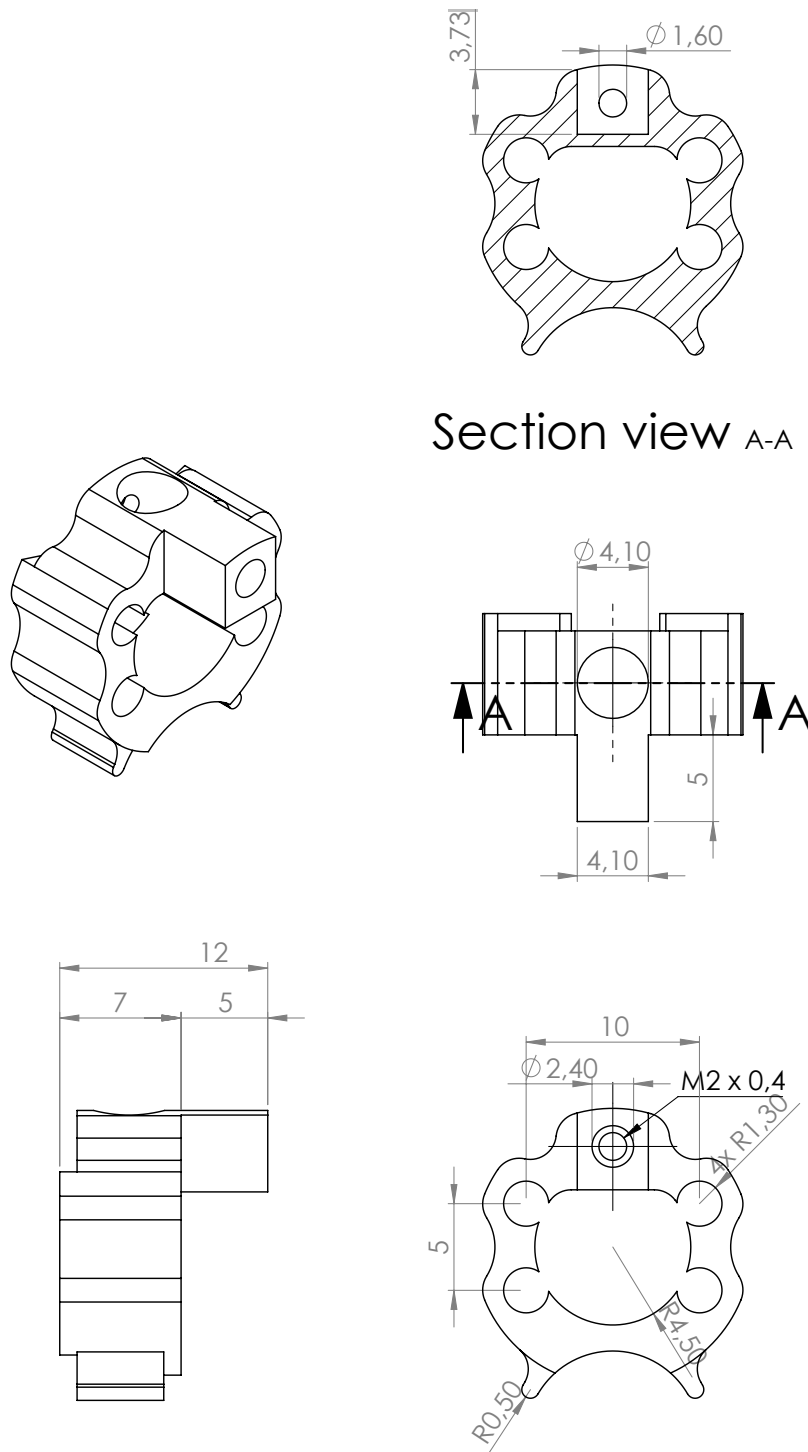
Technical drawing of the sphere holder in the glass cell science chamber. Dimensions are given in millimeter. Material: Macor®.
